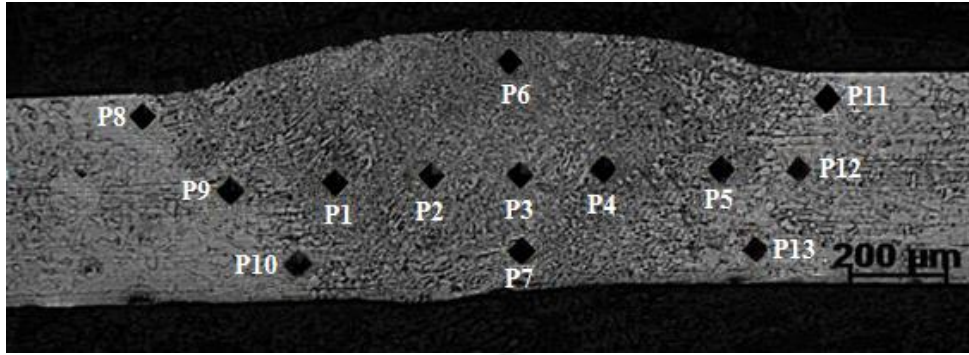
Photograph of a hardness specimen with indentation marks (without post welding heat treated sample).
